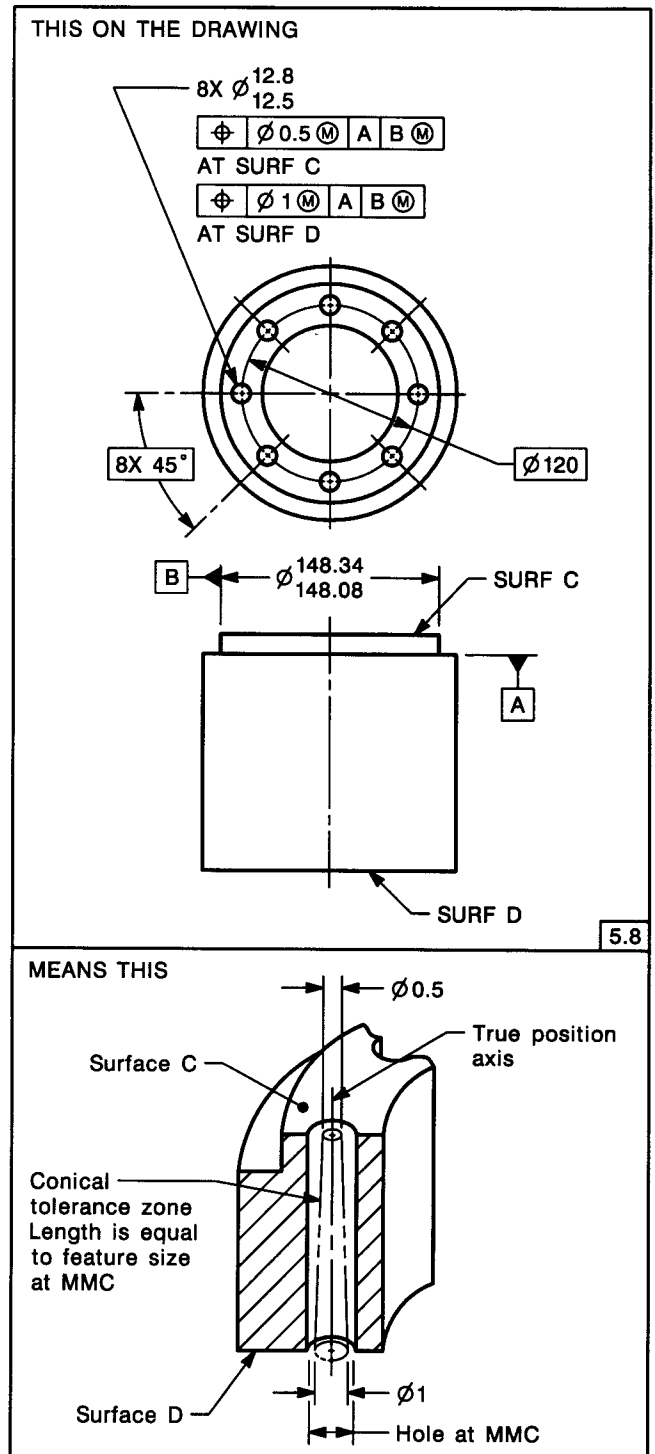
DIFFERENT POSITIONAL TOLERANCE AT EACH END OF LONG HOLE
